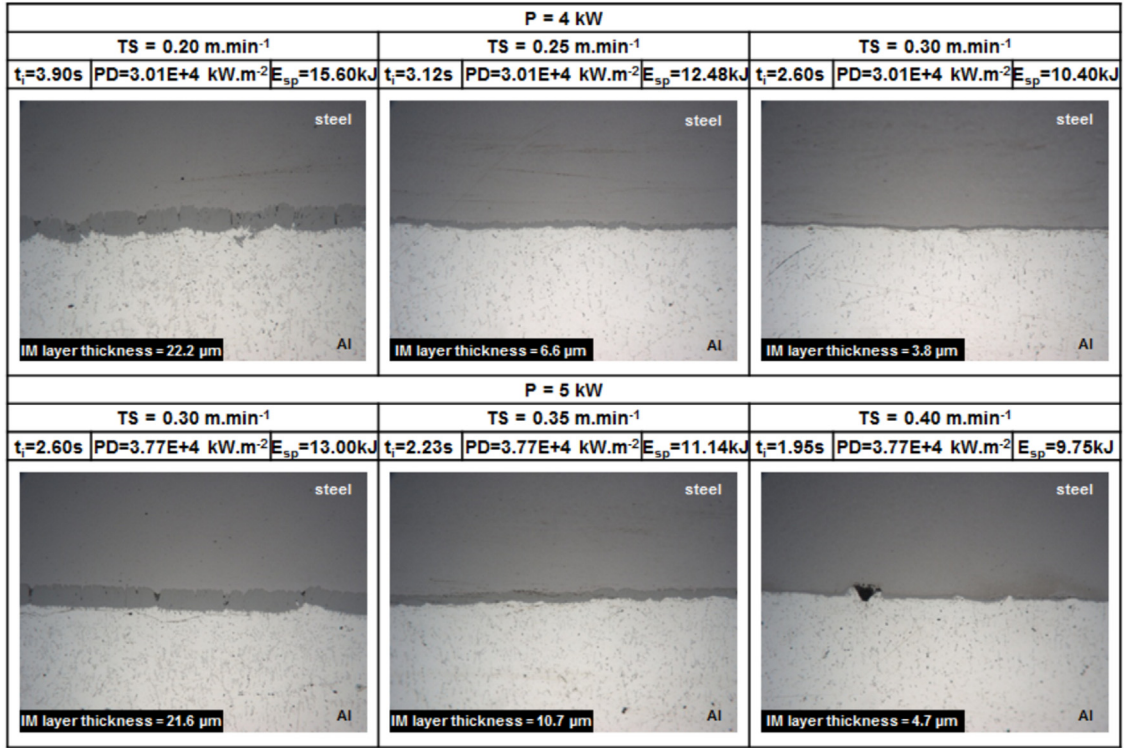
Microscopic cross sectional view showing the IMC layer formed under different welding conditions and constant laser beam diameter of 13 mm
